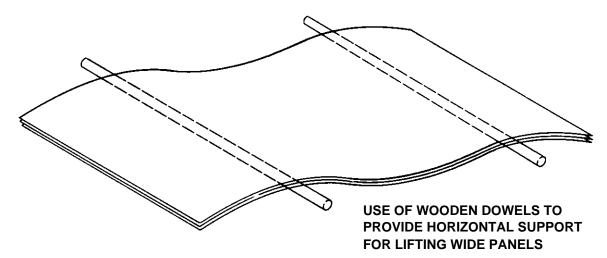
TYPICAL HANDLING OF THIN GAUGE MATERIAL
